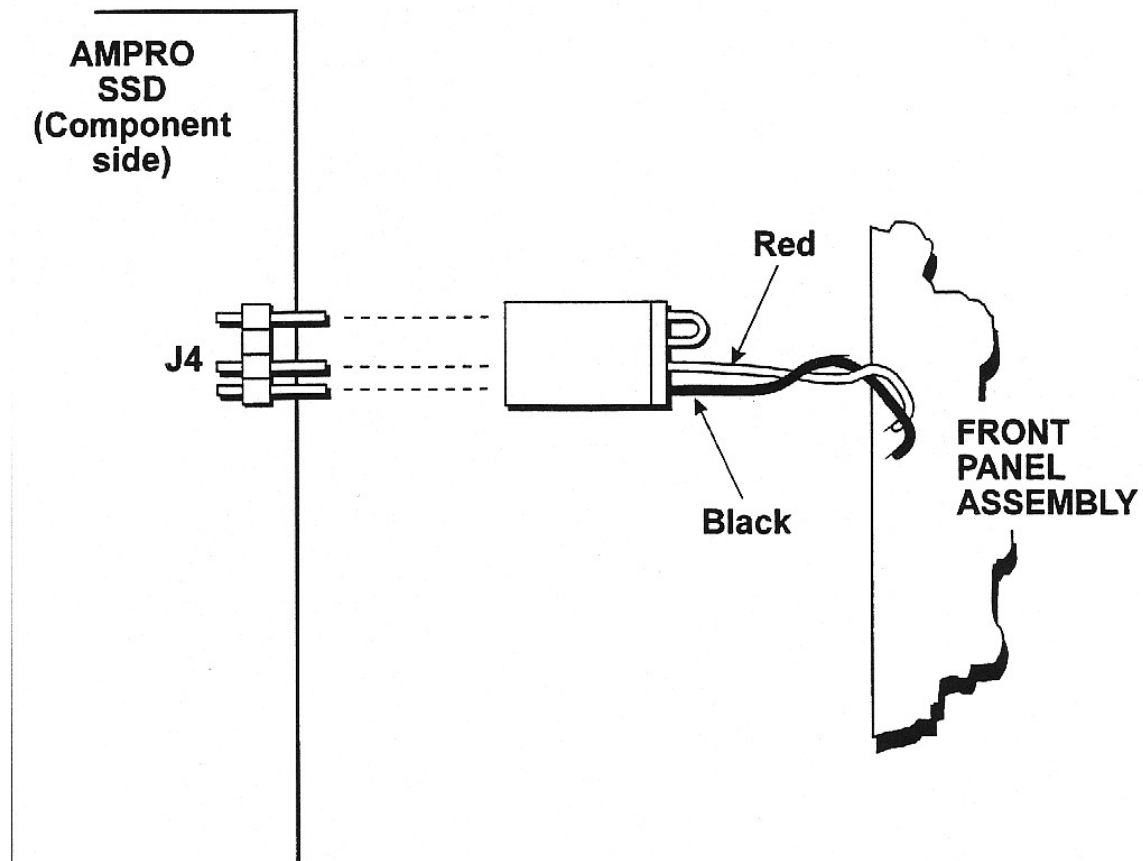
4. XVME-976 Memory Expansion Module Front Panel Assembly
